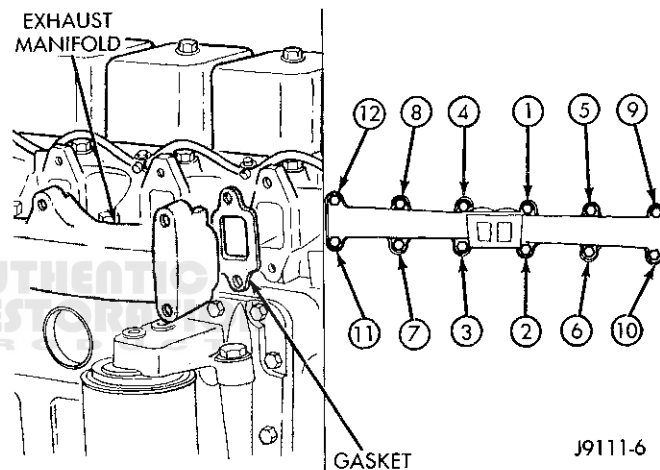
Engine Exhaust Manifold Bolt Tightening Sequence
